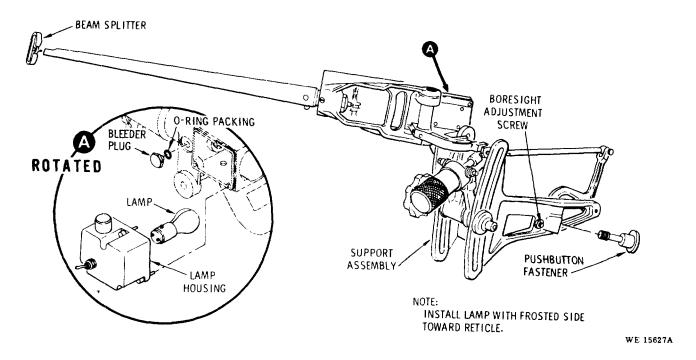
Reflex sight XM70E1--partially exploded view.
